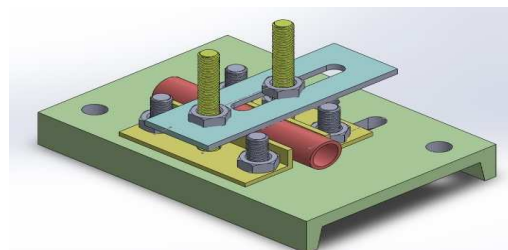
Pipe clamping device for diameter pipe between Ø 30 mm and Ø 60 mm.
